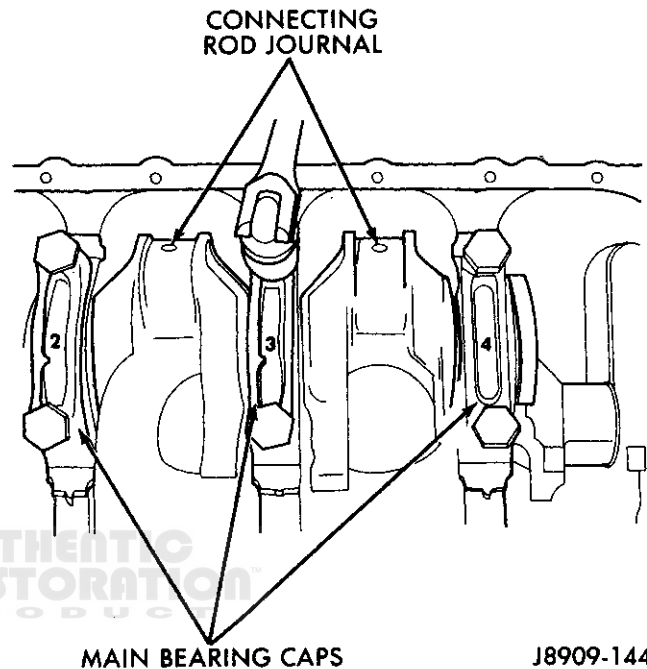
Removing Main Bearing Caps and Lower Inserts
